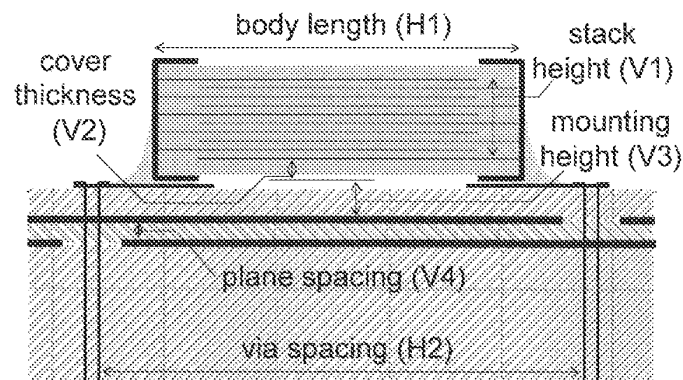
Vertical cross section of an MLCC mounted to PCB planes.
